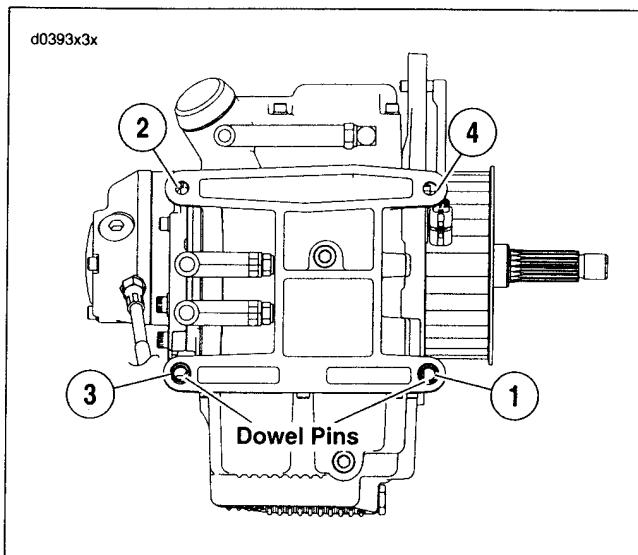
Transmission Housing to Crankcase Torque Sequence
